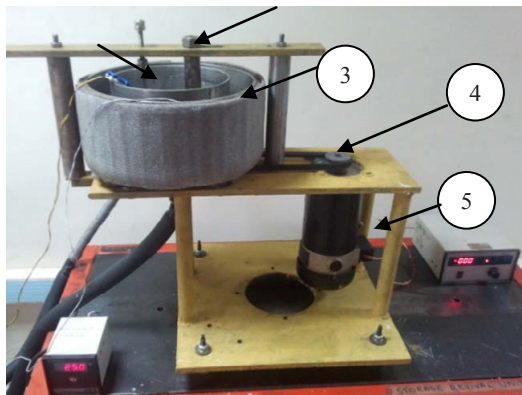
A photograph of drive unit, tool holder and work holder units in IBAP setup
